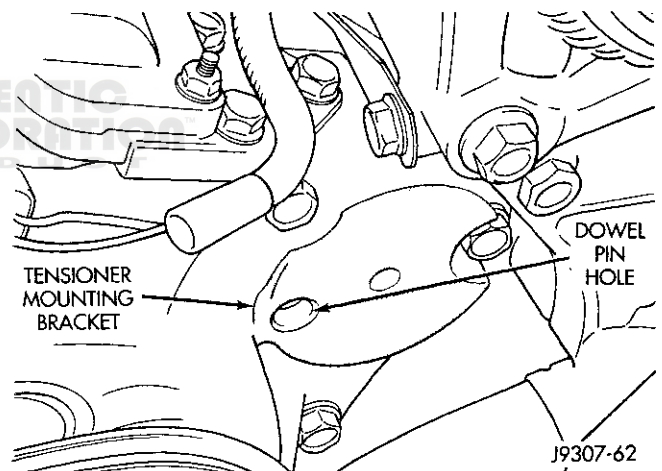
Tensioner Mounting Bracket Dowel Hole—5.9L HDC-Gas Engine
